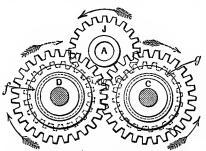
End View of the Three Shafts of the Reversing Mechanism and their Connecting Gears.
